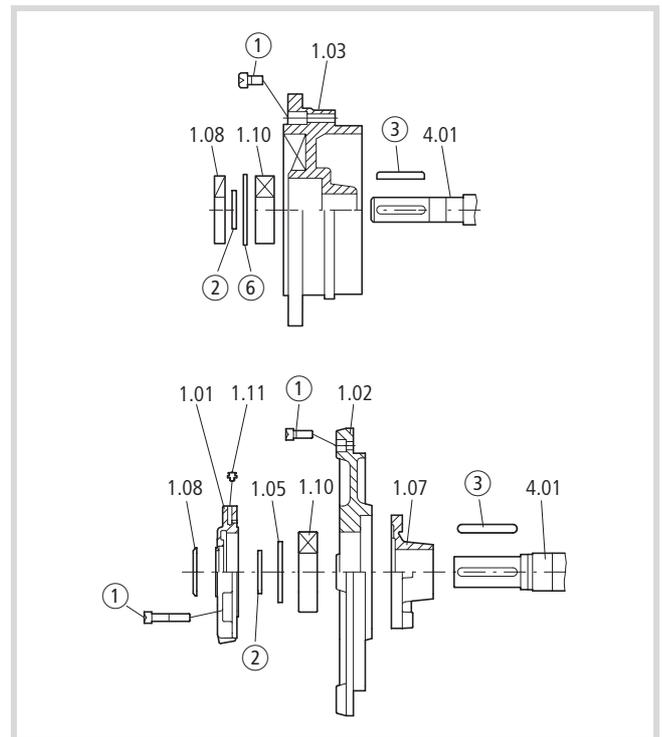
Position of DE shaft seal (1.08) and external DE bearing cover (1.01)
